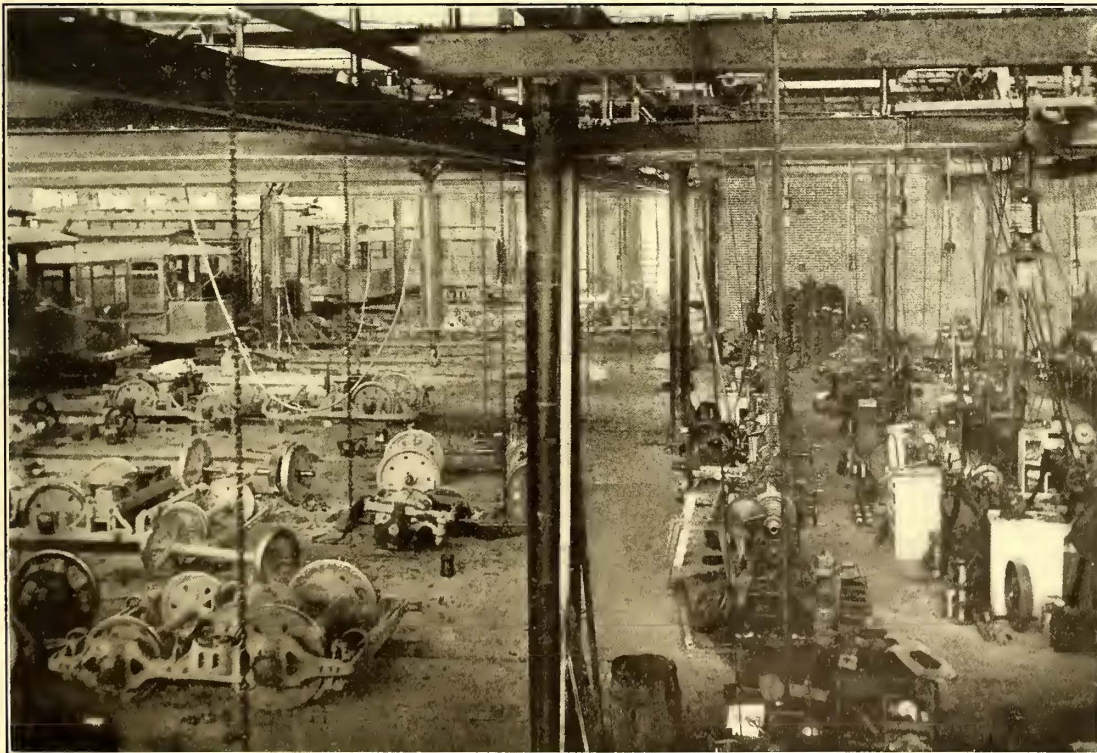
GENERAL VIEW OF MACHINE SHOP AND REPAIR TRACKS
